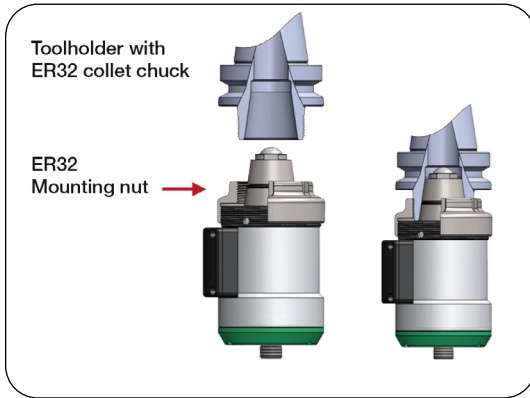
SPEED Jet Spindle holding ER32 collet chuck
